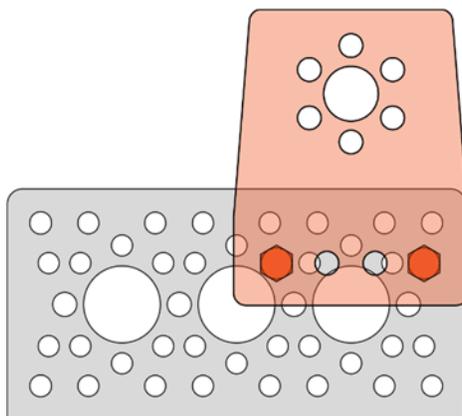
Mounting 15mm Extrusion to Tetrax Channel
